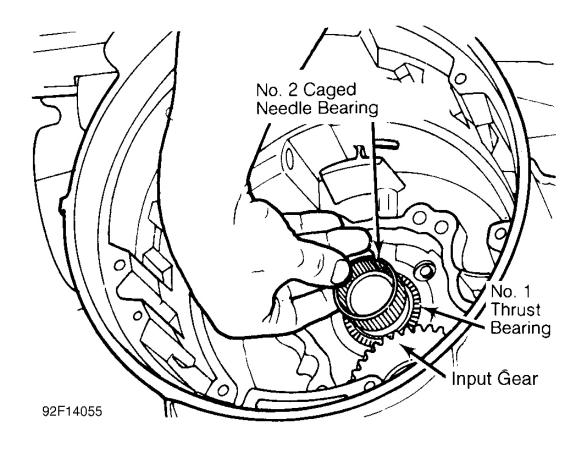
Installing Thrust Bearing & Caged Needle Bearing Courtesy of FORD MOTOR CO.
